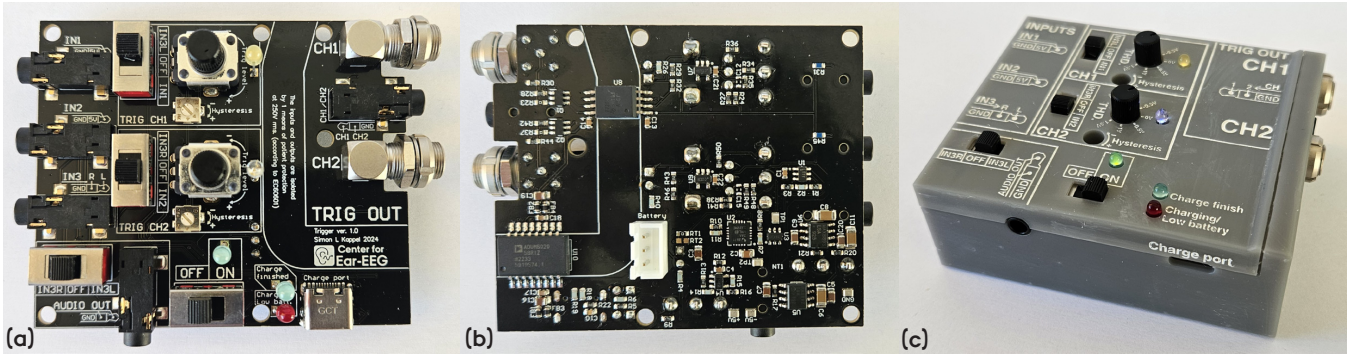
Implementation of the designed trigger box (a) PCB top side, (b) PCB bottom side, (c) PCB mounted in a 3D printed casing together with a Lithium Ion battery. Design files for the trigger box is available from [ece.au.dk/triggerbox](http://ece.au.dk/triggerbox) [11].
